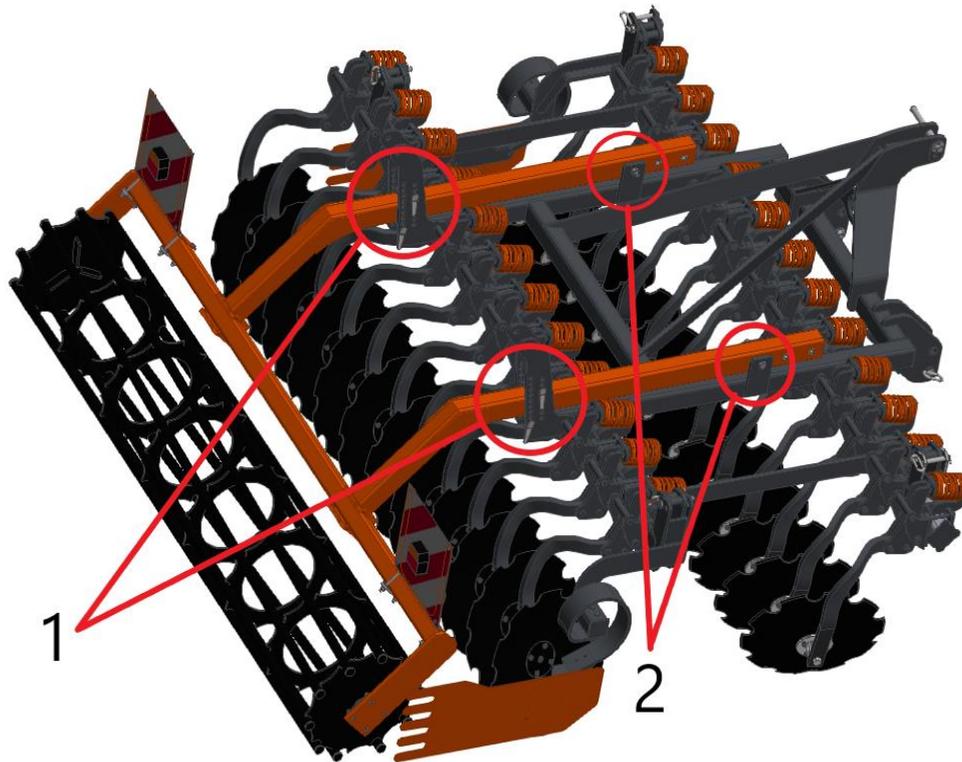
View of the SAL disc harrow with the fixing points of the roller arms, 1 - pin fixing, 2- bolt + nut fixing.
